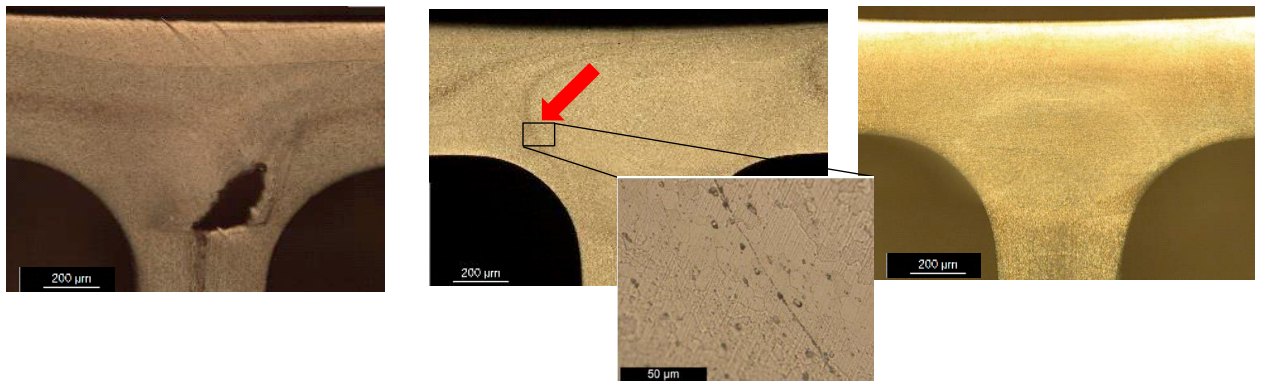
Morphology of welds done with: a) Pyramidal pin on T-lap joint; b) Tapered and threaded pin on T-lap joint (LC) ; c) Progressive pin on T-butt joint (BPP).
